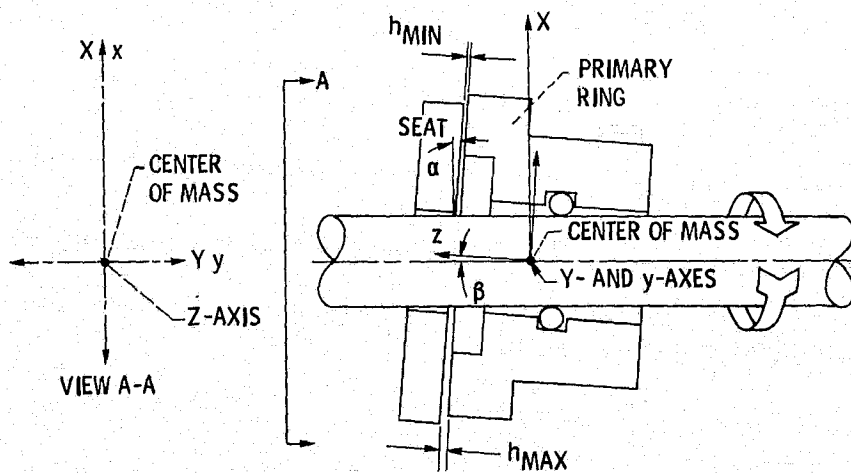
Mathematical model of radial face seal with rotating primary ring.
